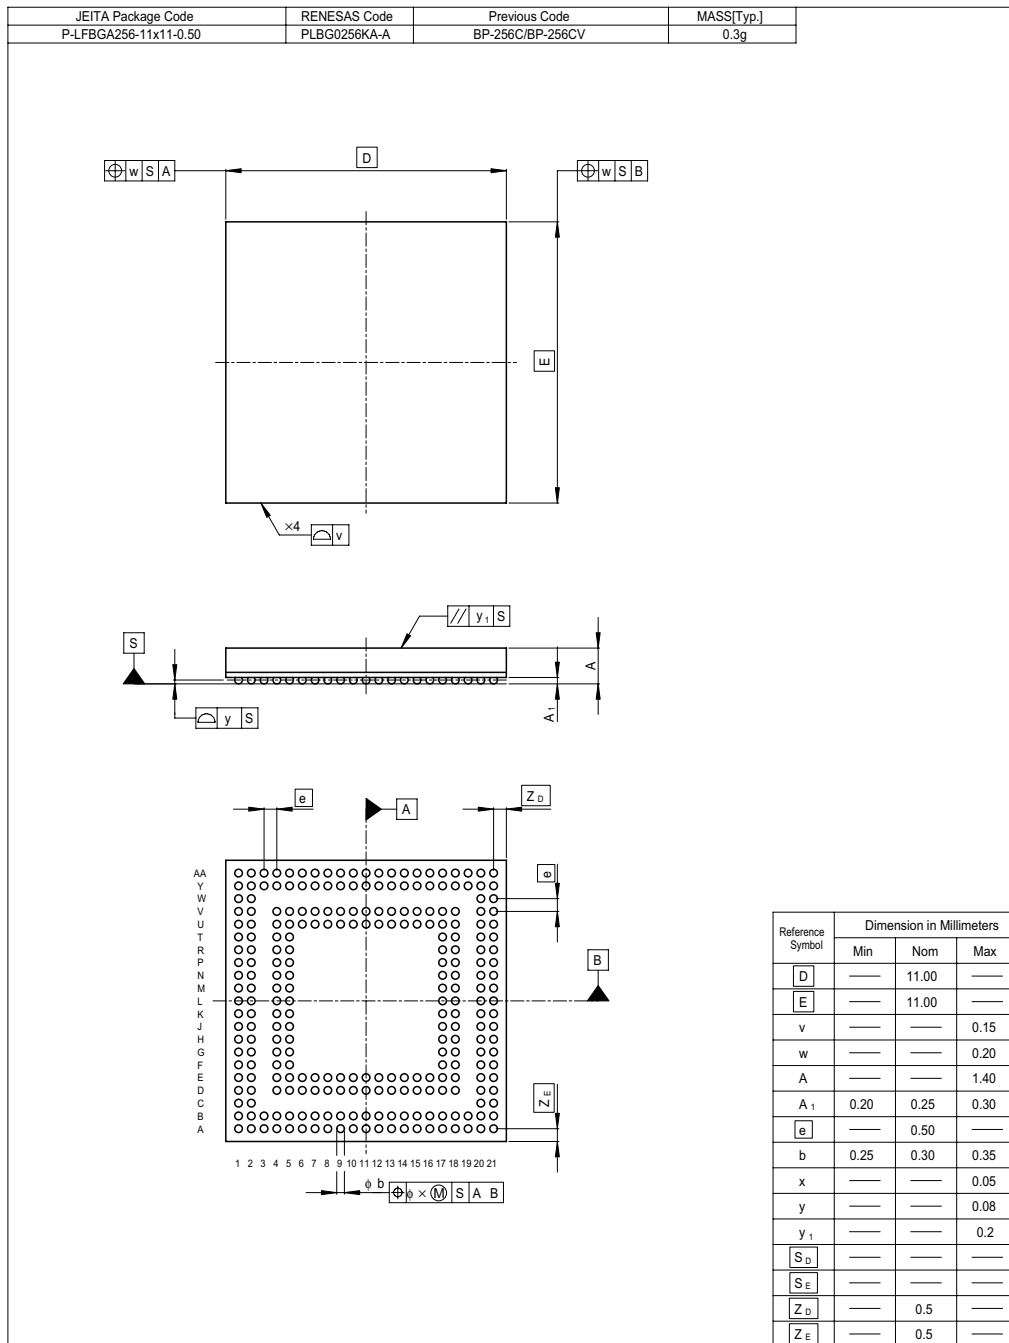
Package Dimensions (PLBG0256KA-A (BP-256C/CV))
